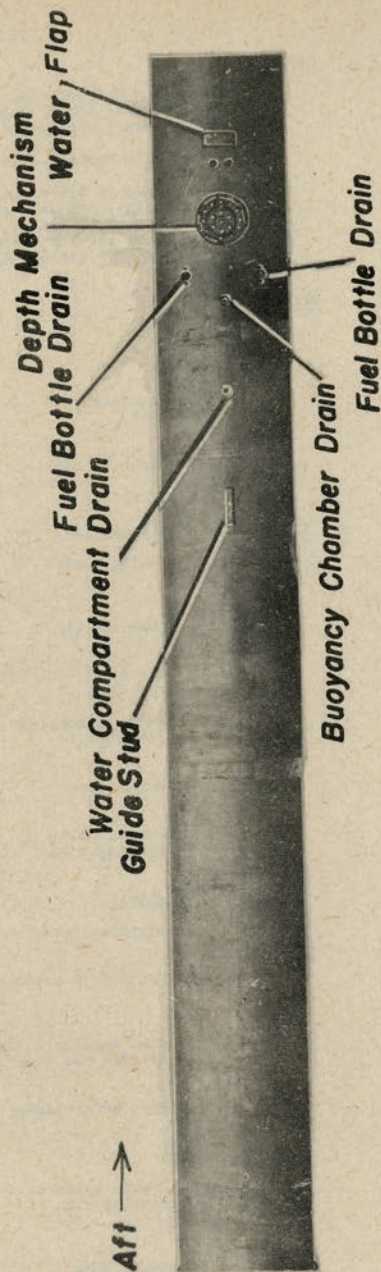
Torpedo Type 89 Mod 1, Flask Section, Bottom View
